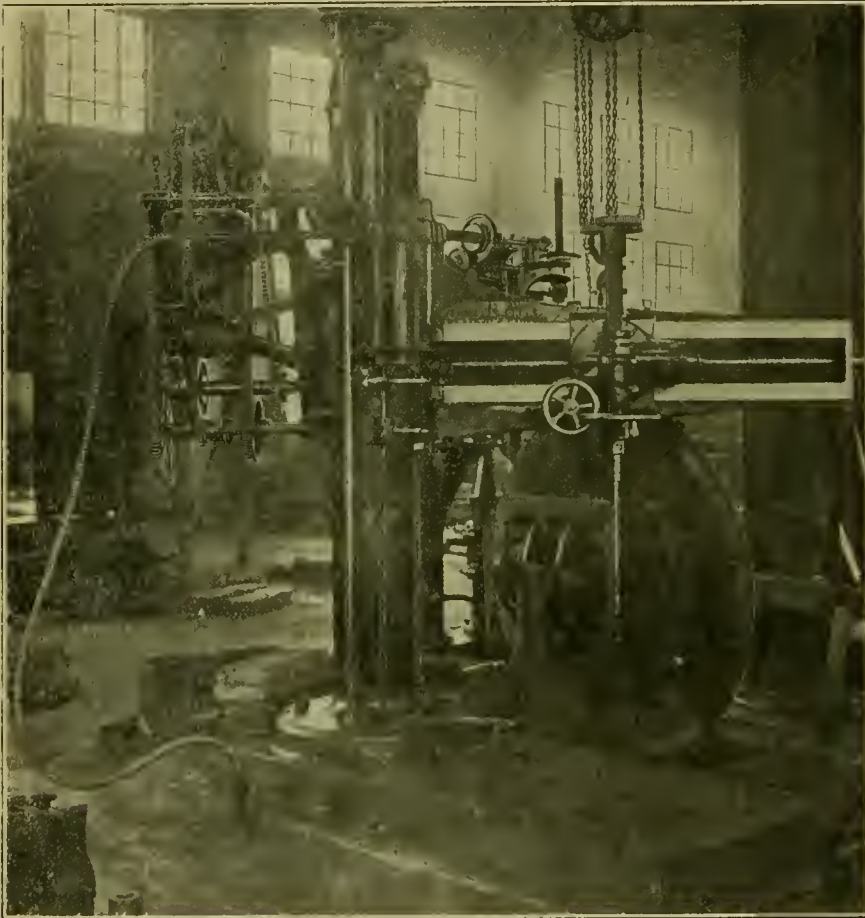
GENERAL VIEW OF THE NILES RADIAL DRILL AS EQUIPPED WITH THE INDIVIDUAL MOTOR DRIVE. CROCKER-WHEELER MOTOR AND CONTROLLER. MCKEES ROCKS SHOPS.—PITTSBURGH & LAKE ERIE.
